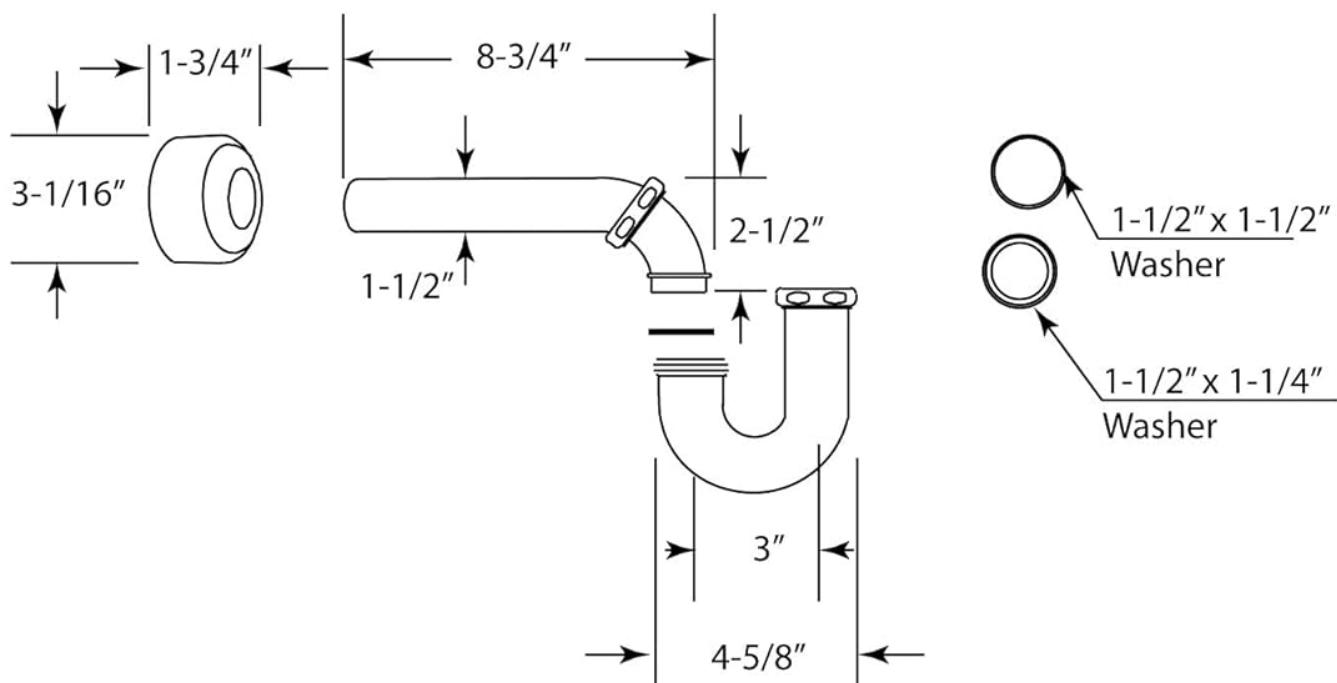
Technical drawing with dimensions for the Westbrass D400-1-62 P-Trap.
